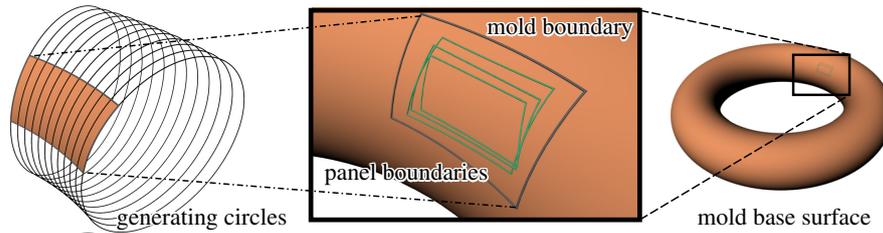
Example of mold reuse. Panel boundary curves are in general not congruent. However, several panels may be closely grouped together on the same mold base surface. In that case the same mold or machine configuration, which embraces all affected panels, may be used to manufacture the panels. This figure further illustrates how the congruent profiles of a rotational or translational surface, in this case the circles generating a torus, can be exploited for mold fabrication.
